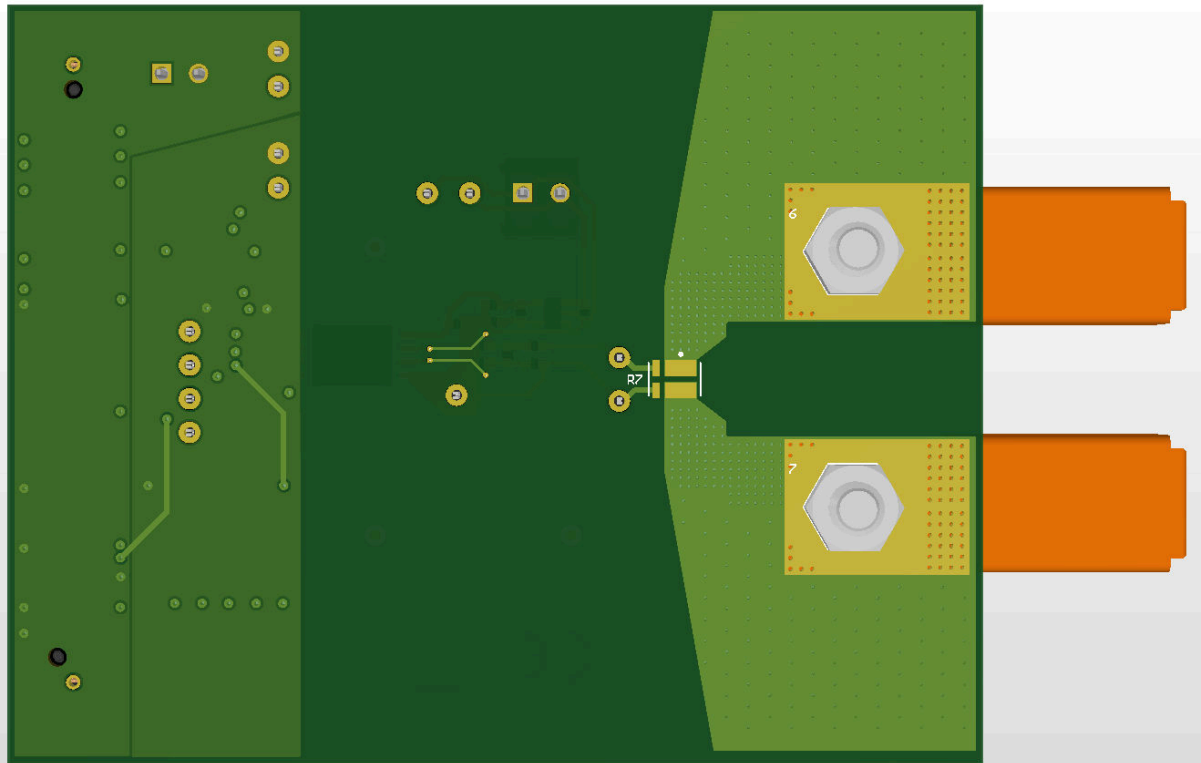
AMC-MOD-50A-EVM Bottom PCB Drawing
